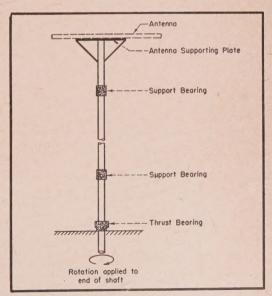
The antenna supporting structure should have both support bearings and thrust bearings. Don't try to make one bearing take both roles!
